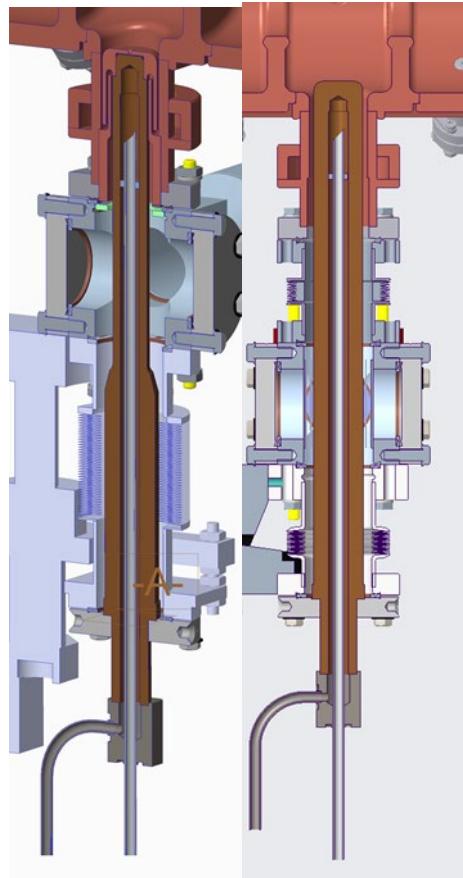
Left: folded coaxial tuner design; right: straight coaxial tuner design.
